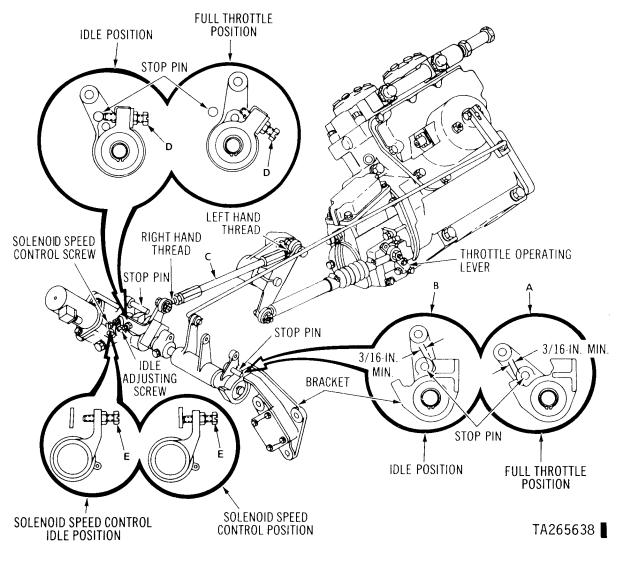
Throttle linkage adjustment, model AVDS-1790-2DR engine.
